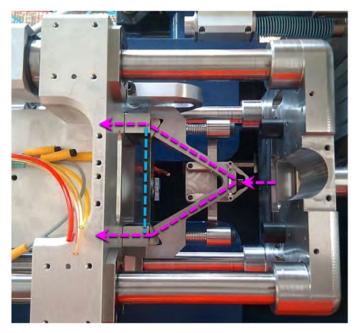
Driver and pressure pad, showing areas of compressive (magenta) and tensile stress (blue) during rivet upset
